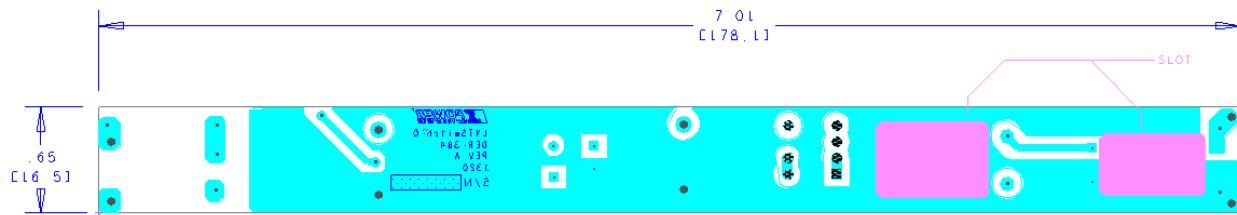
Printed Circuit Layout for P Package. Bottom View.
